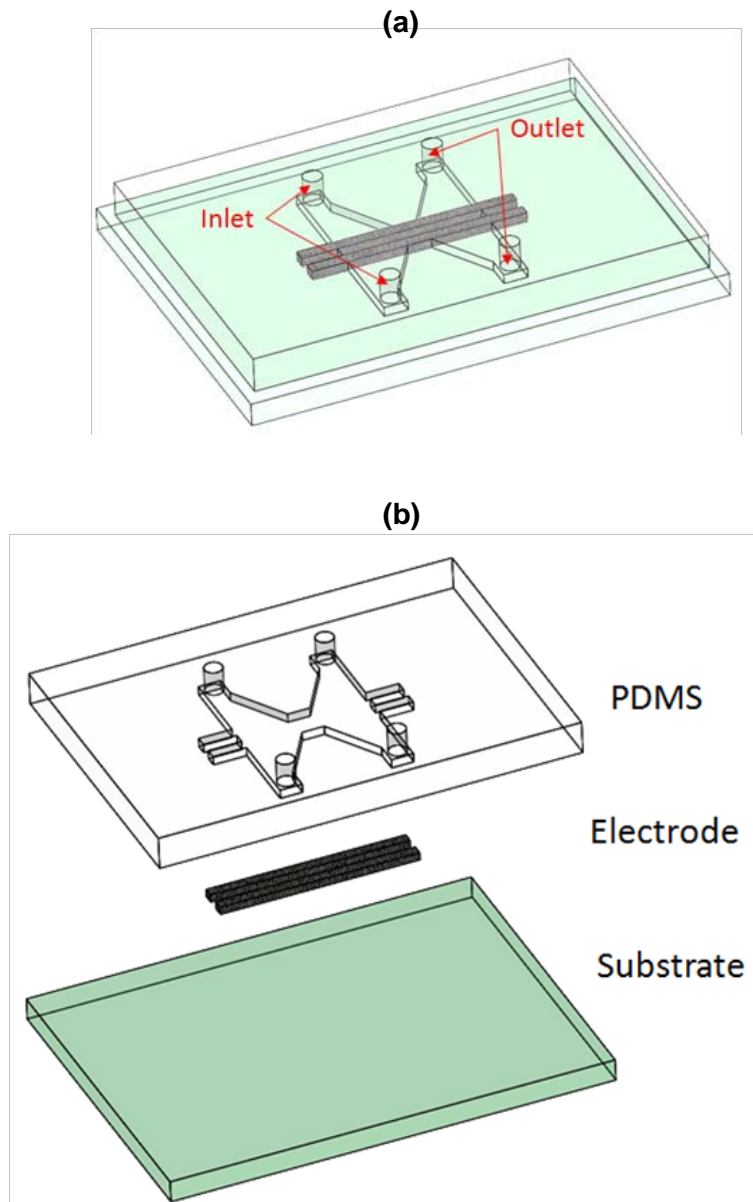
Schematic of the double-pass fuel cell design: (a) assembly view; and (b) exploded view (not to scale).
